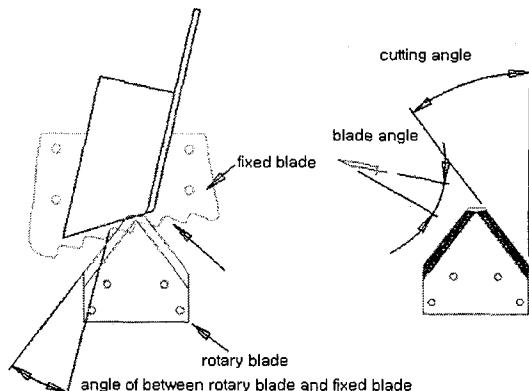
Rotary blade and fixed blade for the designed cutting mechanism
